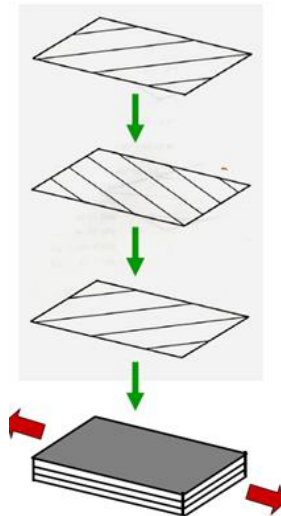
Outline of carbon-fiber layer directionality when brazed onto the aluminum fin.
